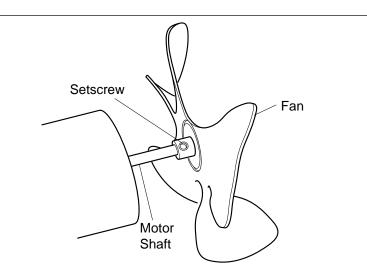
Fan, Motor Shaft, and Setscrew Location
